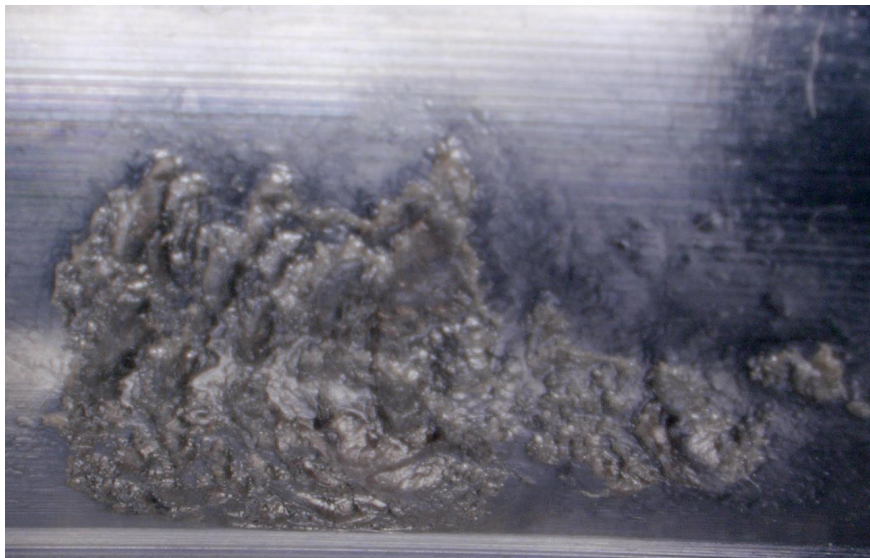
Pitting on the raceway of a four-point contact bearing after RCF test
